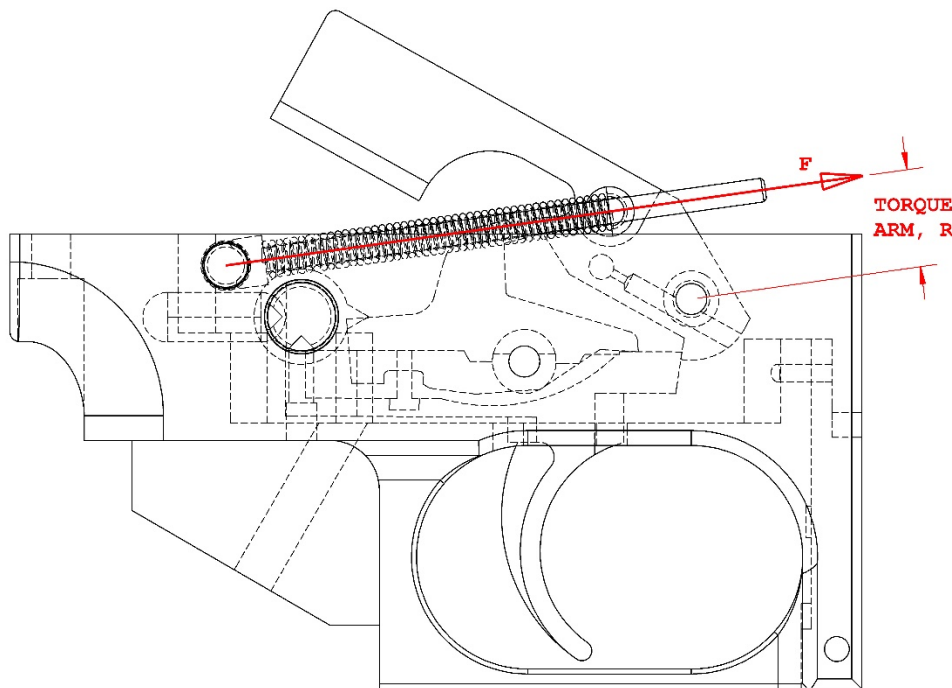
An early embodiment of the 50-BMG rifle fire-control group that included a MIL-spec trigger and disconnector, a tall custom hammer, and a pair of hammer springs as shown. It included no conventional torsion hammer spring. Note the compression springs' force vector.
